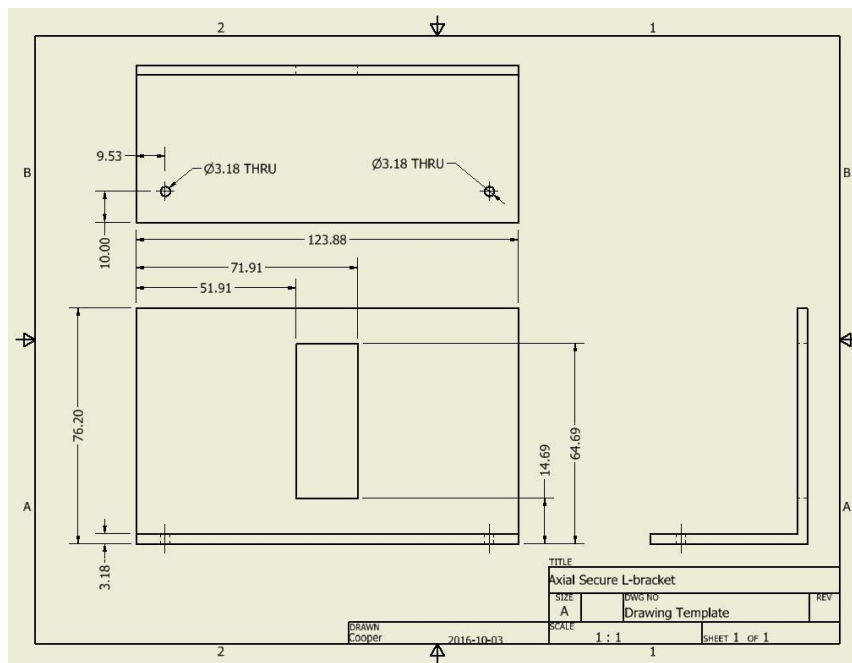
Dimensional Drawing of Axial Secure L-Bracket
